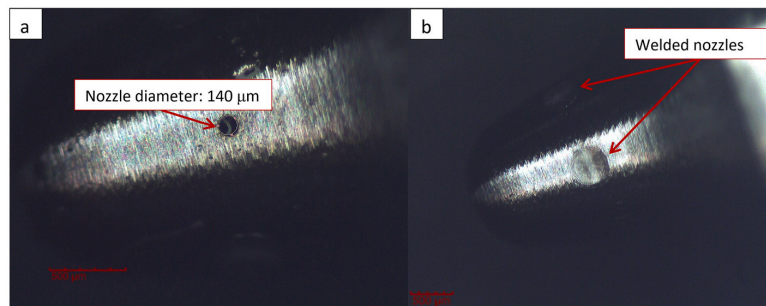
A microscopic photo of injectors: a) open nozzles and b) welded nozzles using laser technology.
